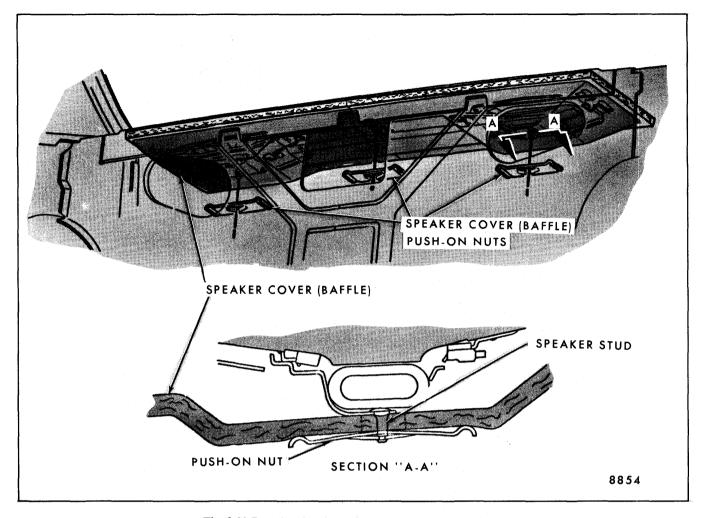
Rear Speaker (Stereo) Cover (Baffle) Installation
